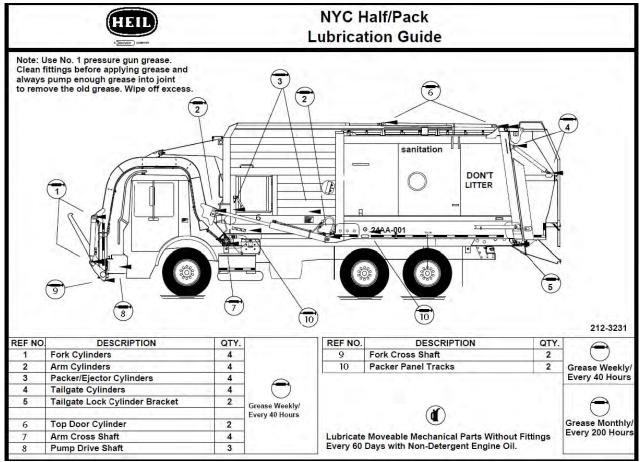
NYC Half/Pack Lubrication Guide, PN 212-3231
